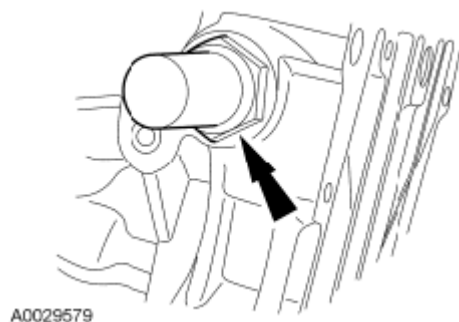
Identifying Camshaft Holding Tool And Adapter For 303-577
